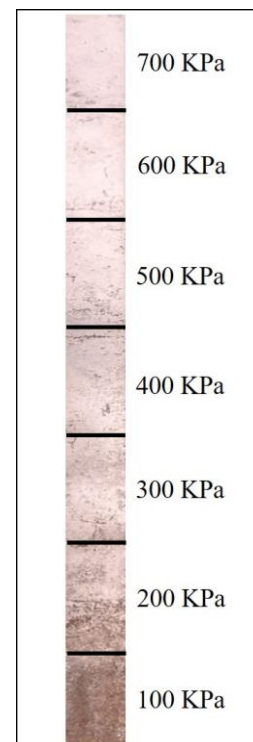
Surface finish of rusted metal plate after blasting at different air pressure settings
